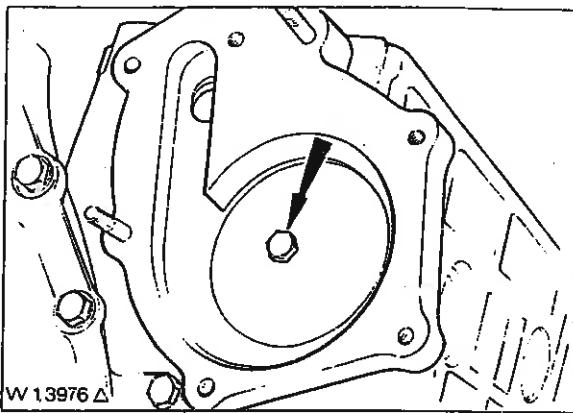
Water Pump Backplate Showing Retaining Set Bolt Behind Pump on 2728T Engine
